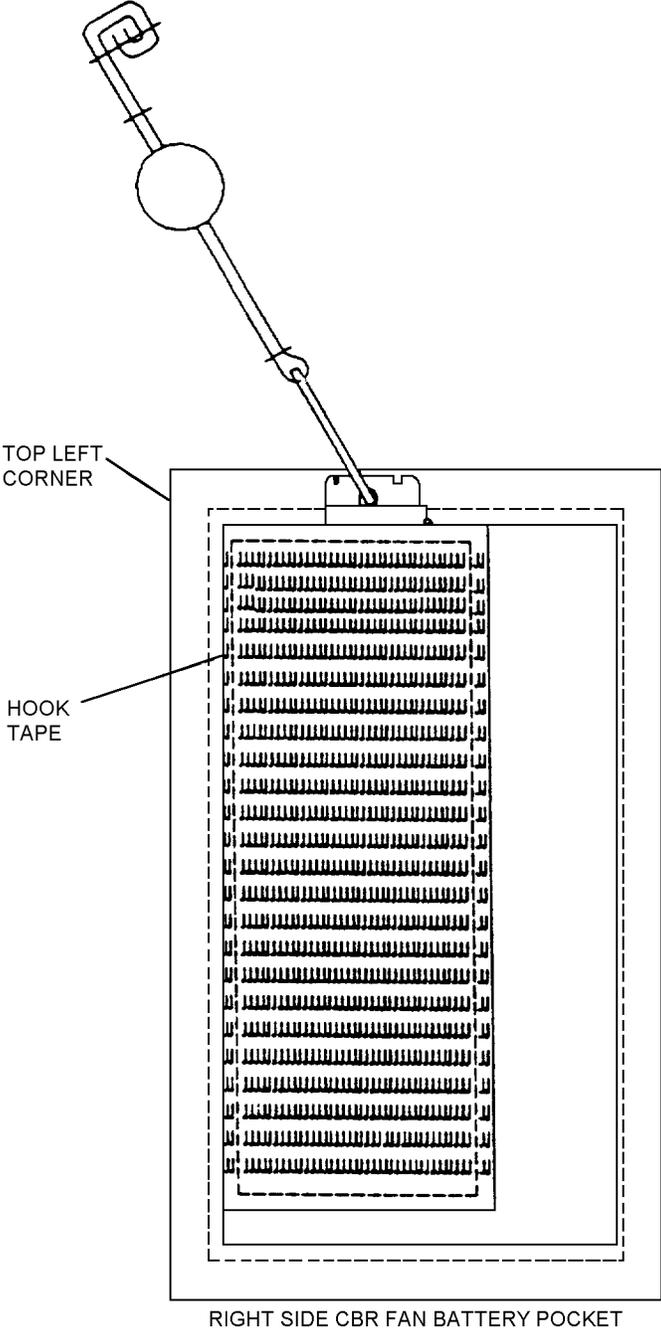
Attachment of Hook Tape to CBR Pusher Fan Battery Pocket
